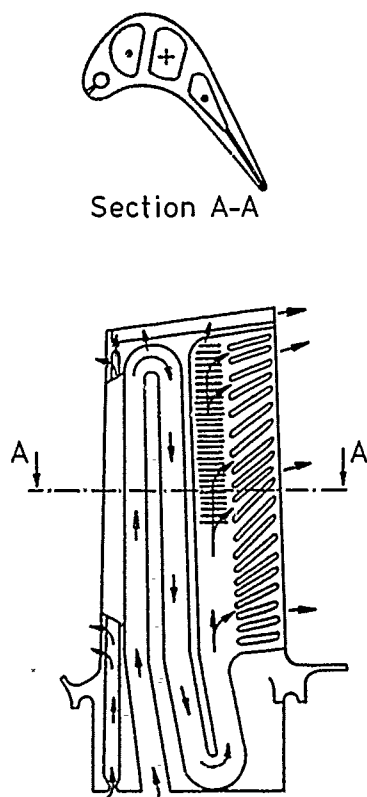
Typical jet-engine multi-pass cooling geometry based on the turbine rotor blade of Clifford [1].
